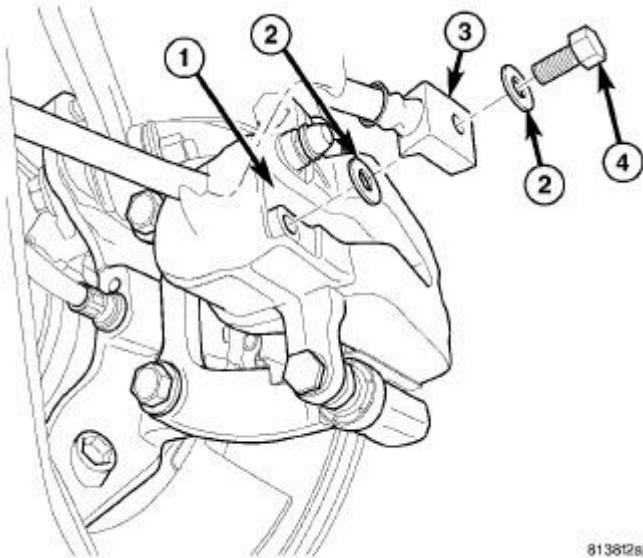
FLEX HOSE CONNECTION AT REAR CALIPER
